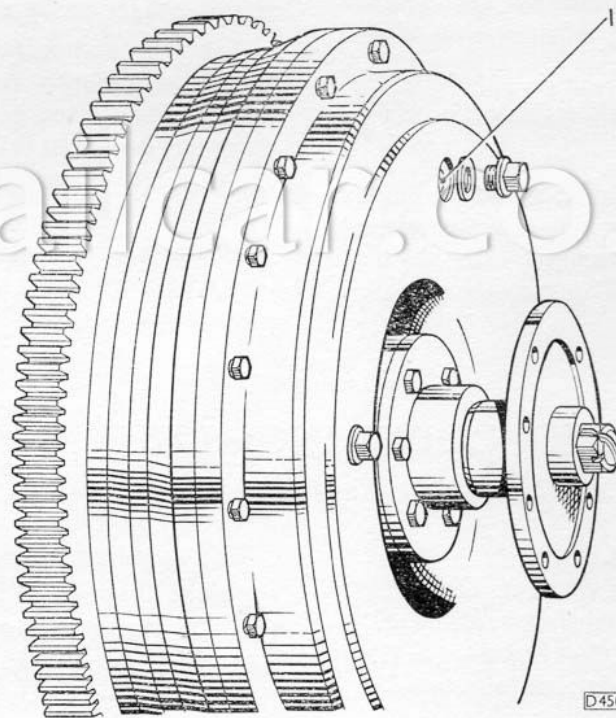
Position of filler plug hole (1) when filling or topping-up the fluid coupling.
